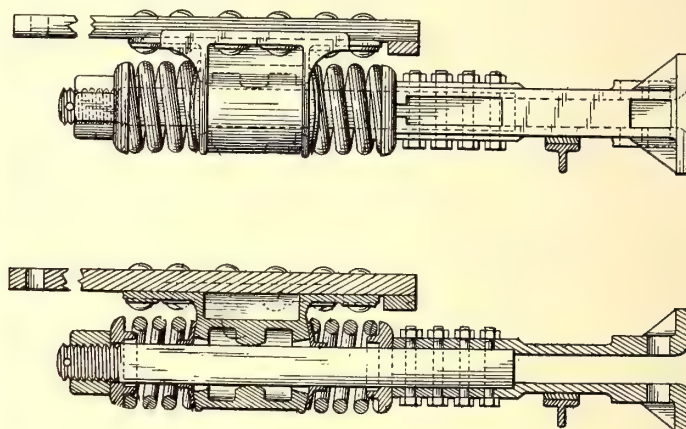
SHAFT RIGGING PROVIDING FOR UP AND DOWN MOTION OF DRAW-BAR
